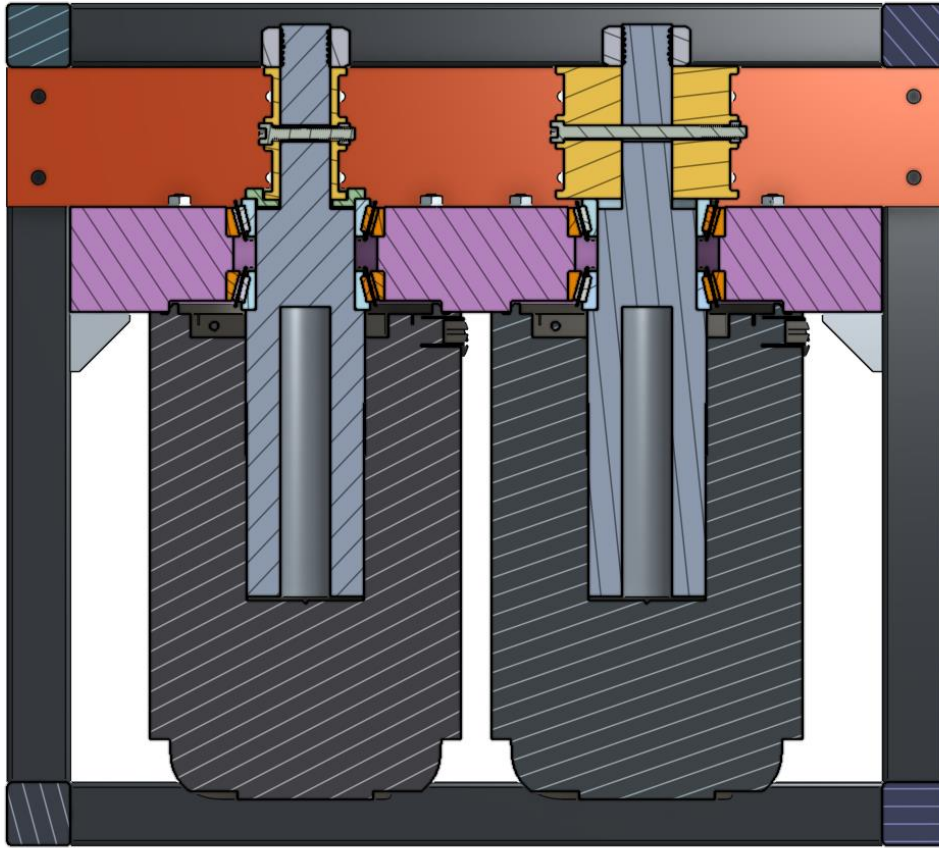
Cross section view of the assembly. Note that the shafts were made hollow in the center to reduce inertia. The motor 3D models provided by the manufacturer do not show the internal rotor-stator or feedback assemblies.
